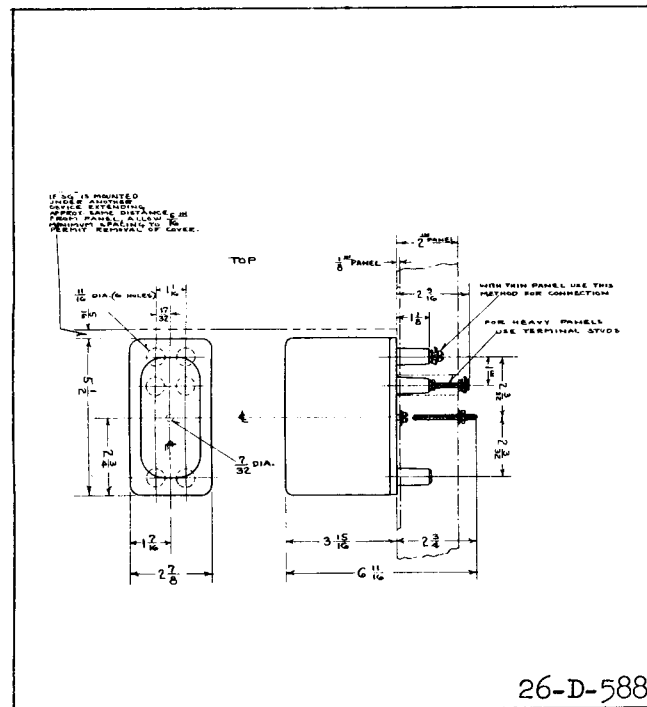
Outline & Drilling Plan For the Type PM-4 Aux-
